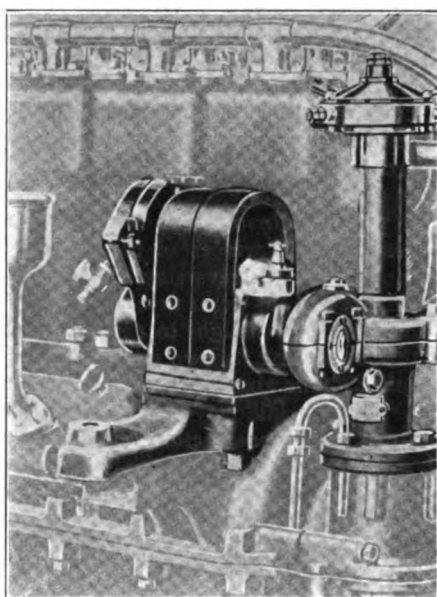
UNUSUAL MAGNETO AND TIMER DRIVE ON RUTENBER MOTOR
